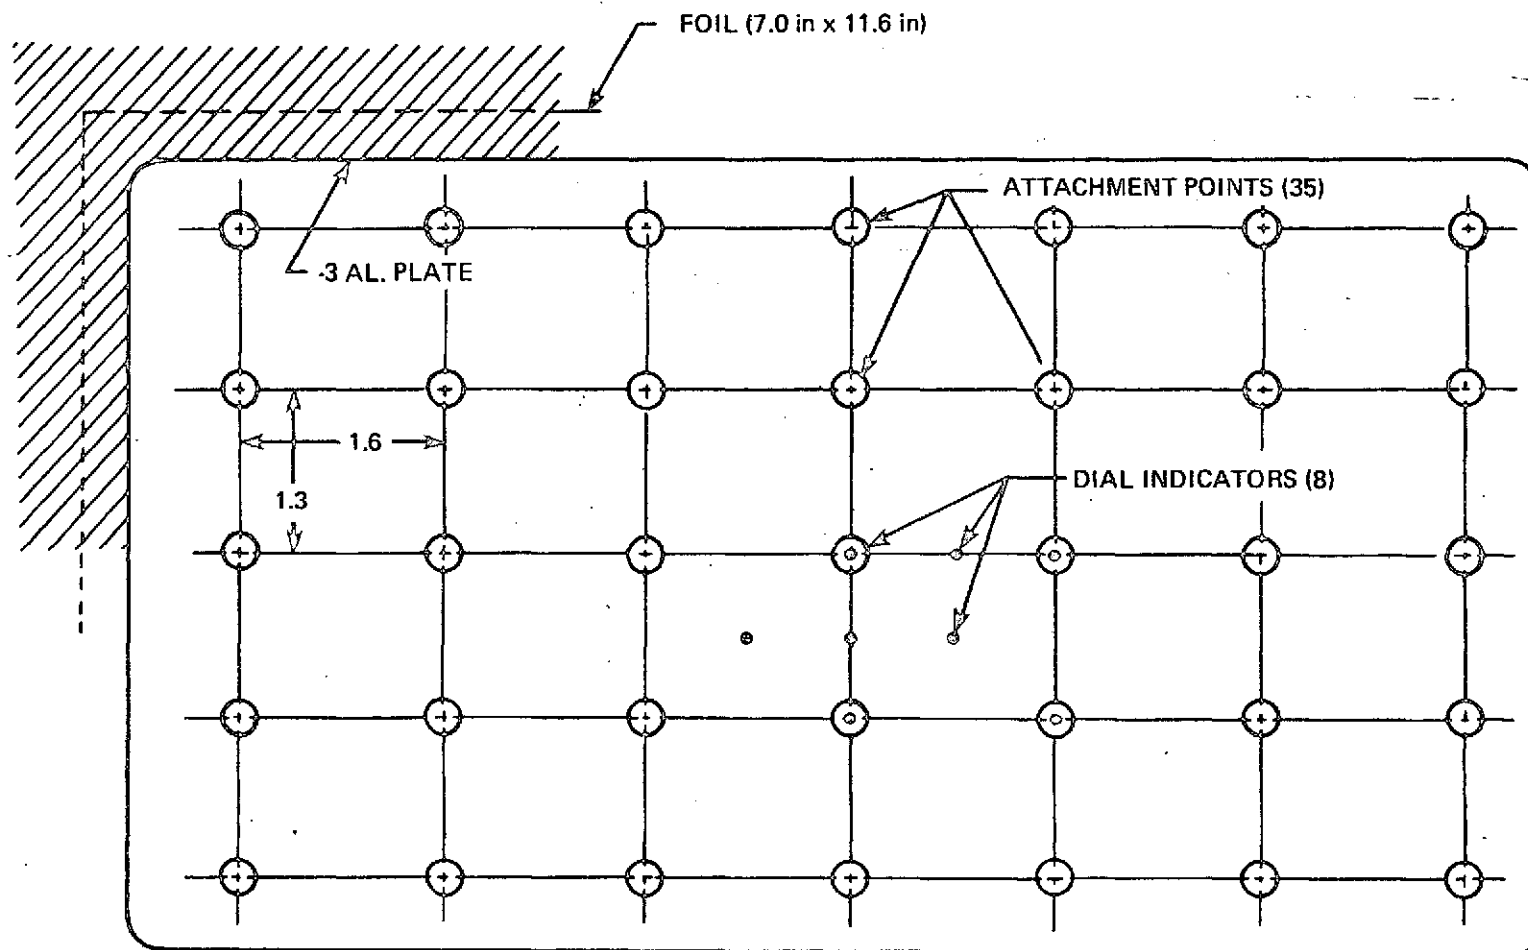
REAR SURFACE, VENTING PRESSURE TEST FIXTURE
